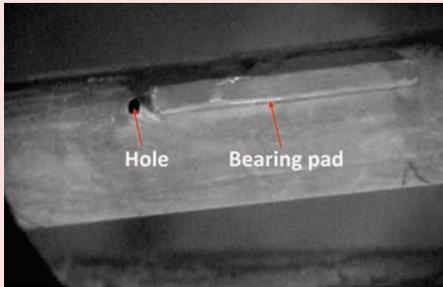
Pinhole due to damaged bearing pad from bundle no. 102653
